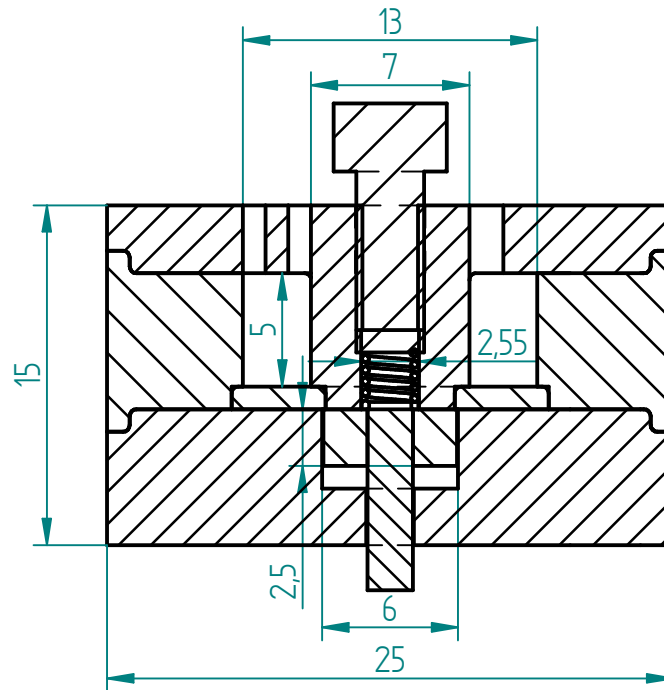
The dimensions of the actuator prototype in millimeters.
